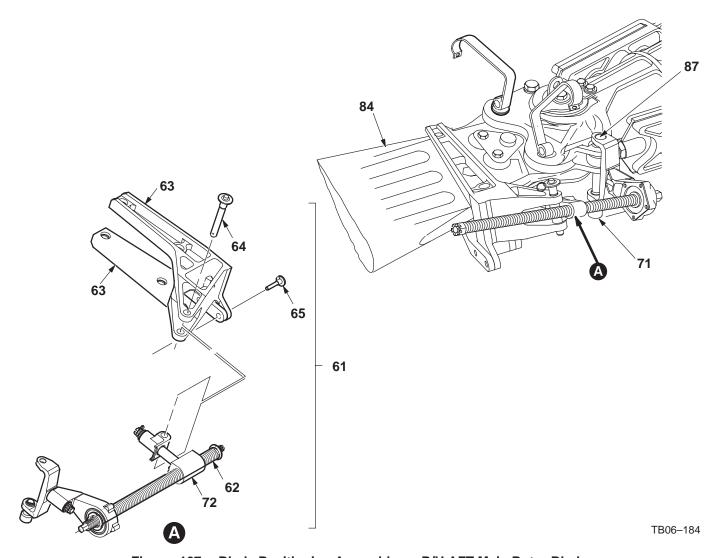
Blade Positioning Assembly on R/H AFT Main Rotor Blade
